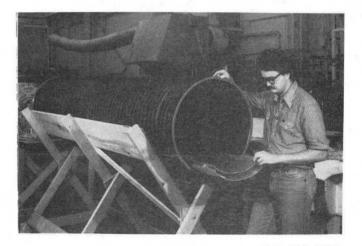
Station 2, Assembly of Cable Assembly into Outer Jacket. Track and Cable Assembly Carrier in Place
